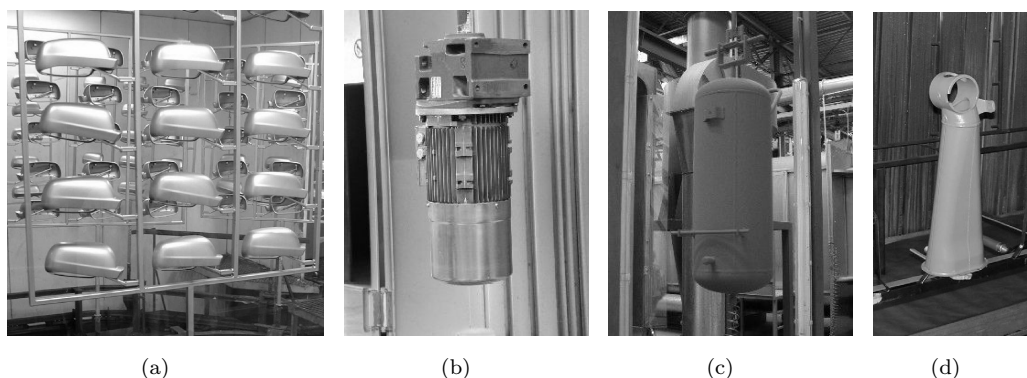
Example of parts to be painted automatically: (a) car mirrors from FICO, (b) ROSSI gearbox with motor, (c) FINI compressor tank, (d) and a truck steering column from MAN.
